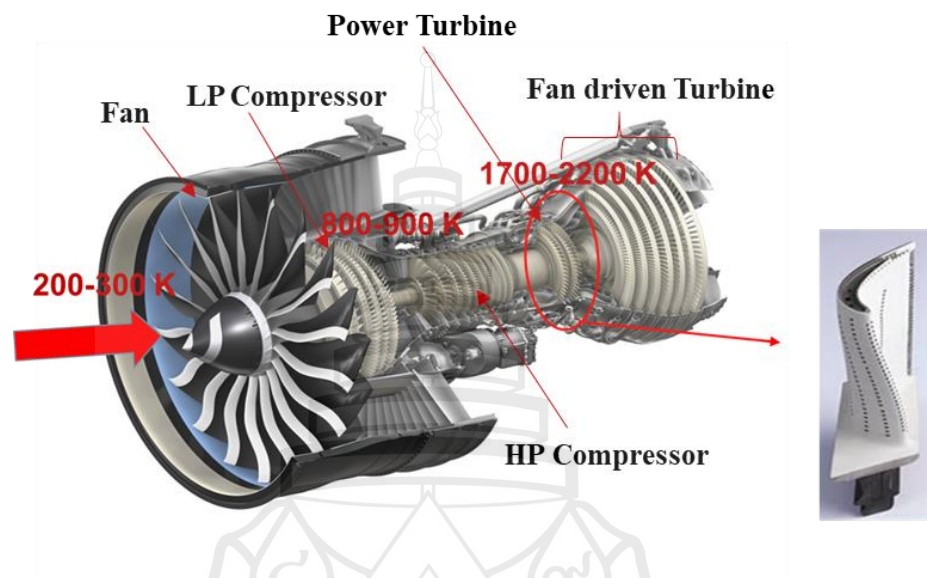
Set of turbine blade component hot gas path (NASA, GE90 Turbofan)
